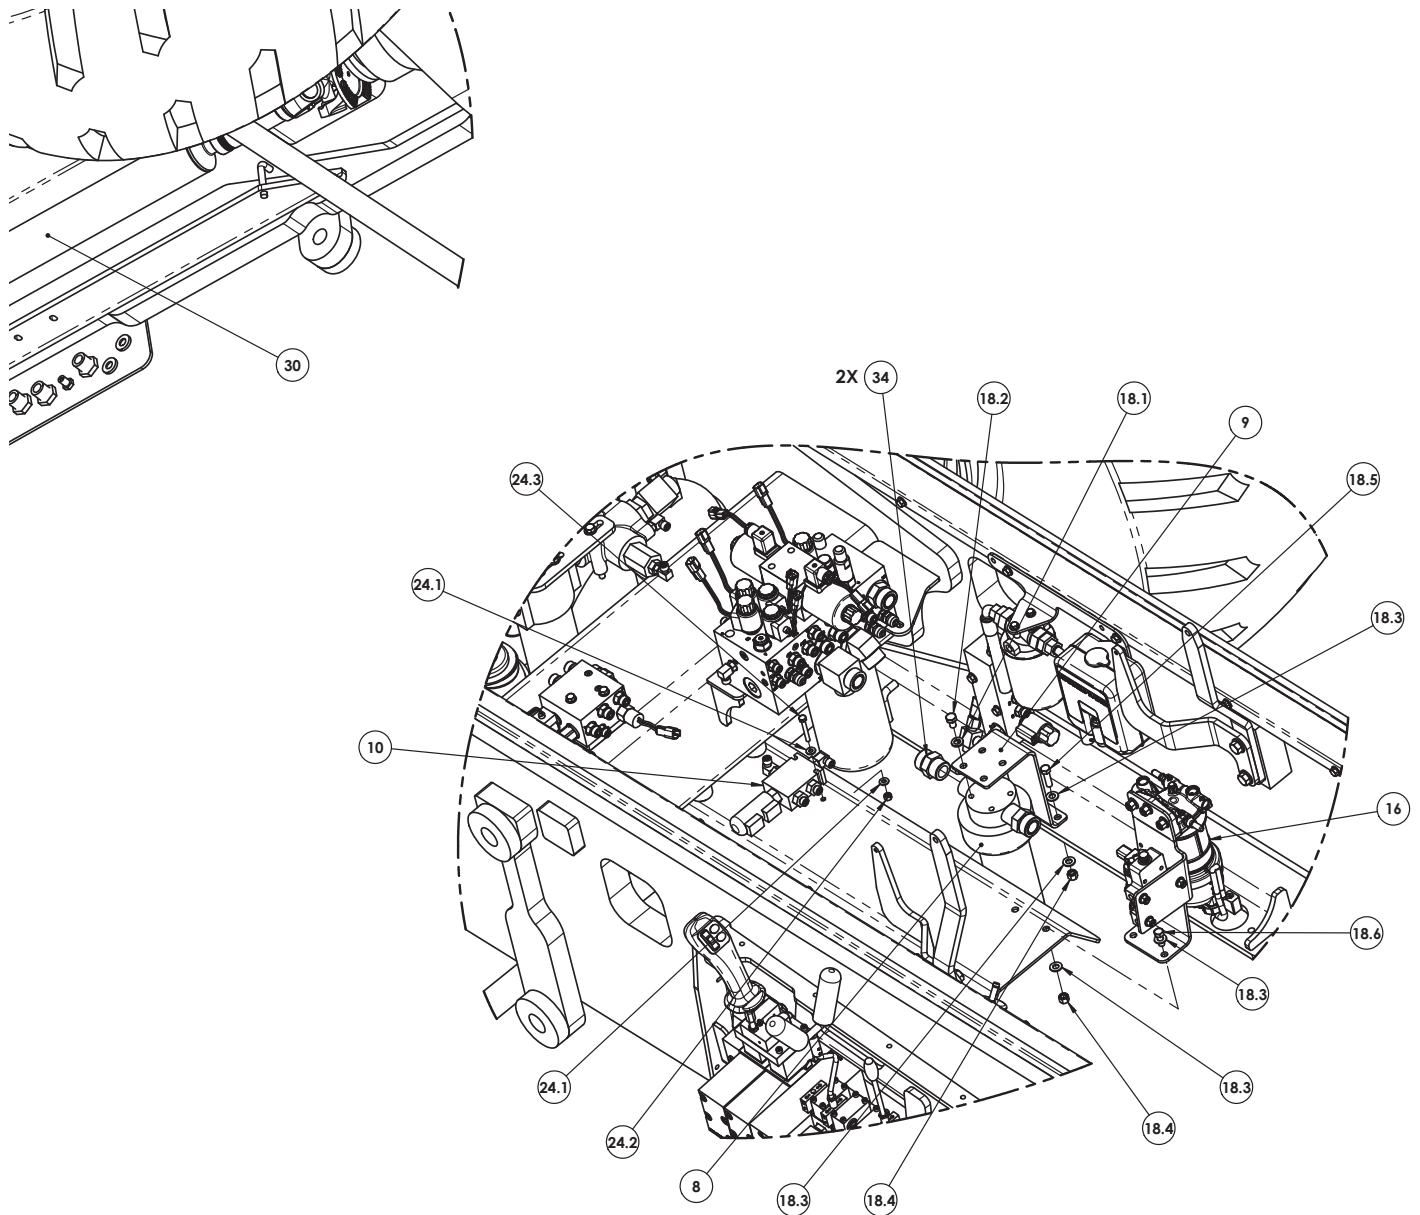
CHASSIS ASSEMBLY - ENGINE (32003-000)
